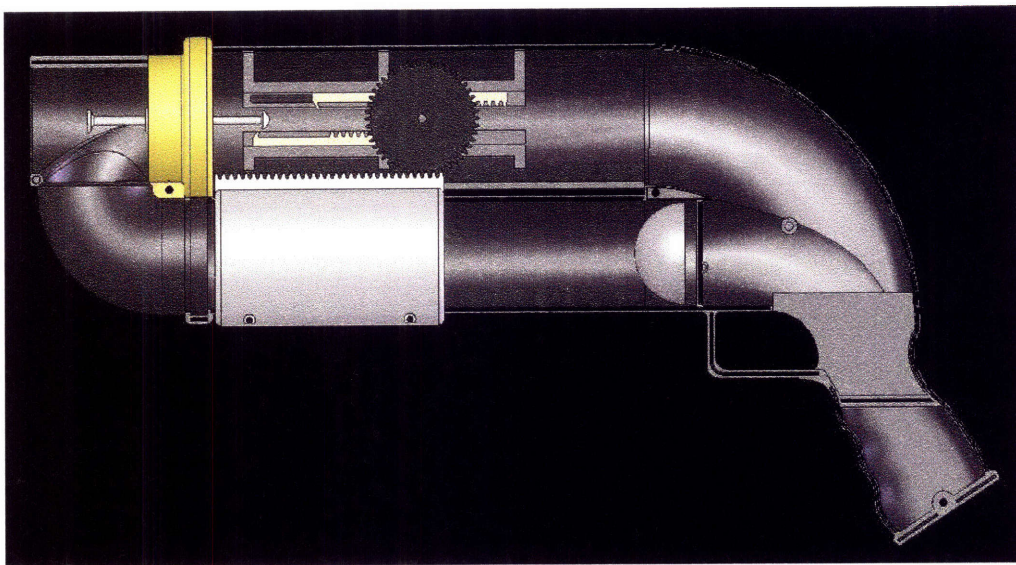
A special piece could be made which would complete the popper holder, so that the cocking mechanism can be observed in this open state, for troubleshooting.
